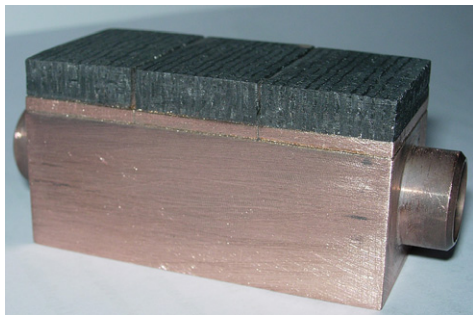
Flat-tile mock-up produced by the one-step brazing process.
